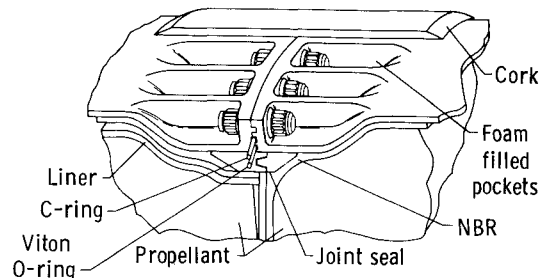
Proposed bolted joint configuration (from Ref. 3).
